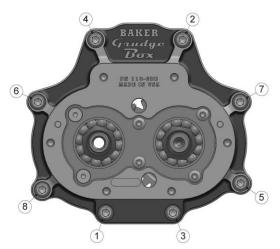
| TORQUE SEQUENCE FOR GRUDGEBOX BEARING DOOR BOLTS
